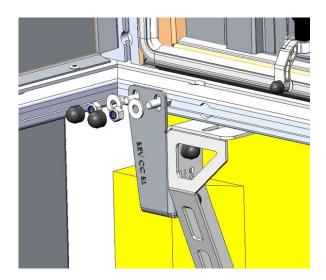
Position the Rear Mounting Bracket over the inserted Hex Bolt and fasten with a Washer and Nyloc Nut
